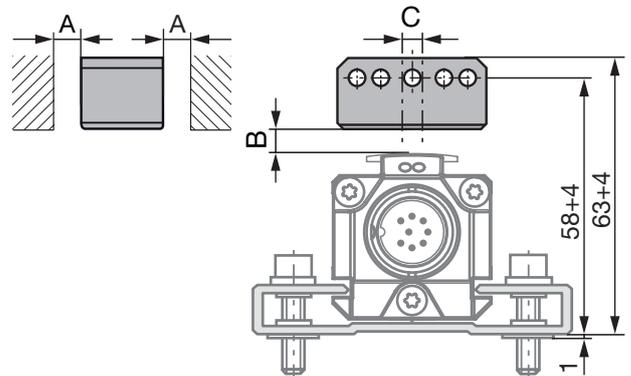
Dimensions and distances with BTL6-A-3801-2 magnet
